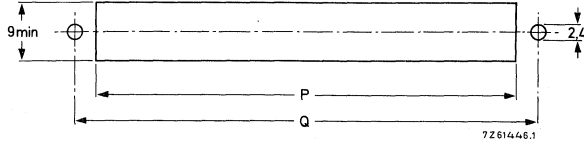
Hole pattern for panel mounting of male parts; see Table 4 for dimensions P and Q.
